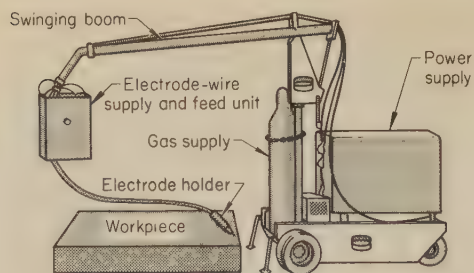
Self-contained portable unit for on-location gas metal-arc welding
